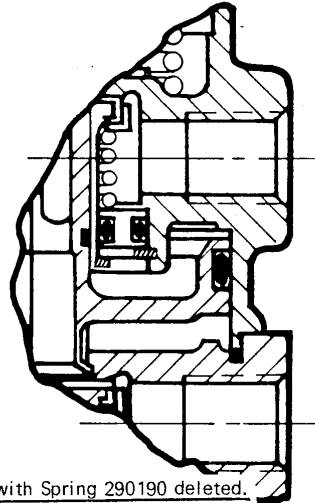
Upper Body Assembly with Spring 290190 deleted.
